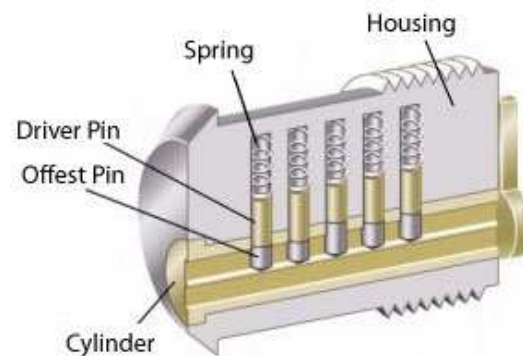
Cross-sectional view of a pin tumbler lock [11]
